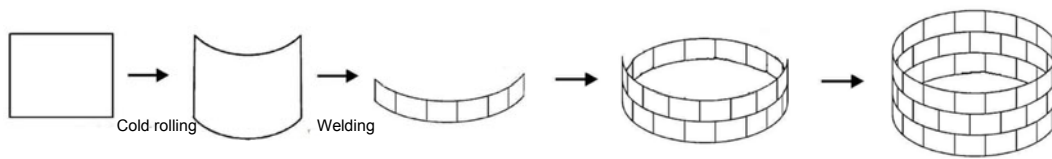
Typical manufacturing process of welded steel cylindrical shells
